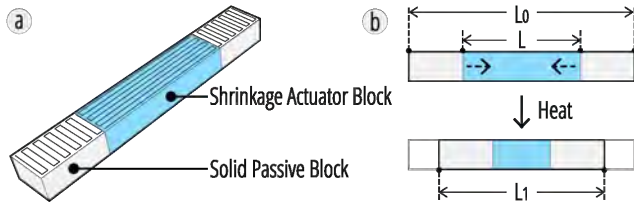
Shrinkage actuator design. (a) Block assignments and printing toolpaths; (b) Actuation.
